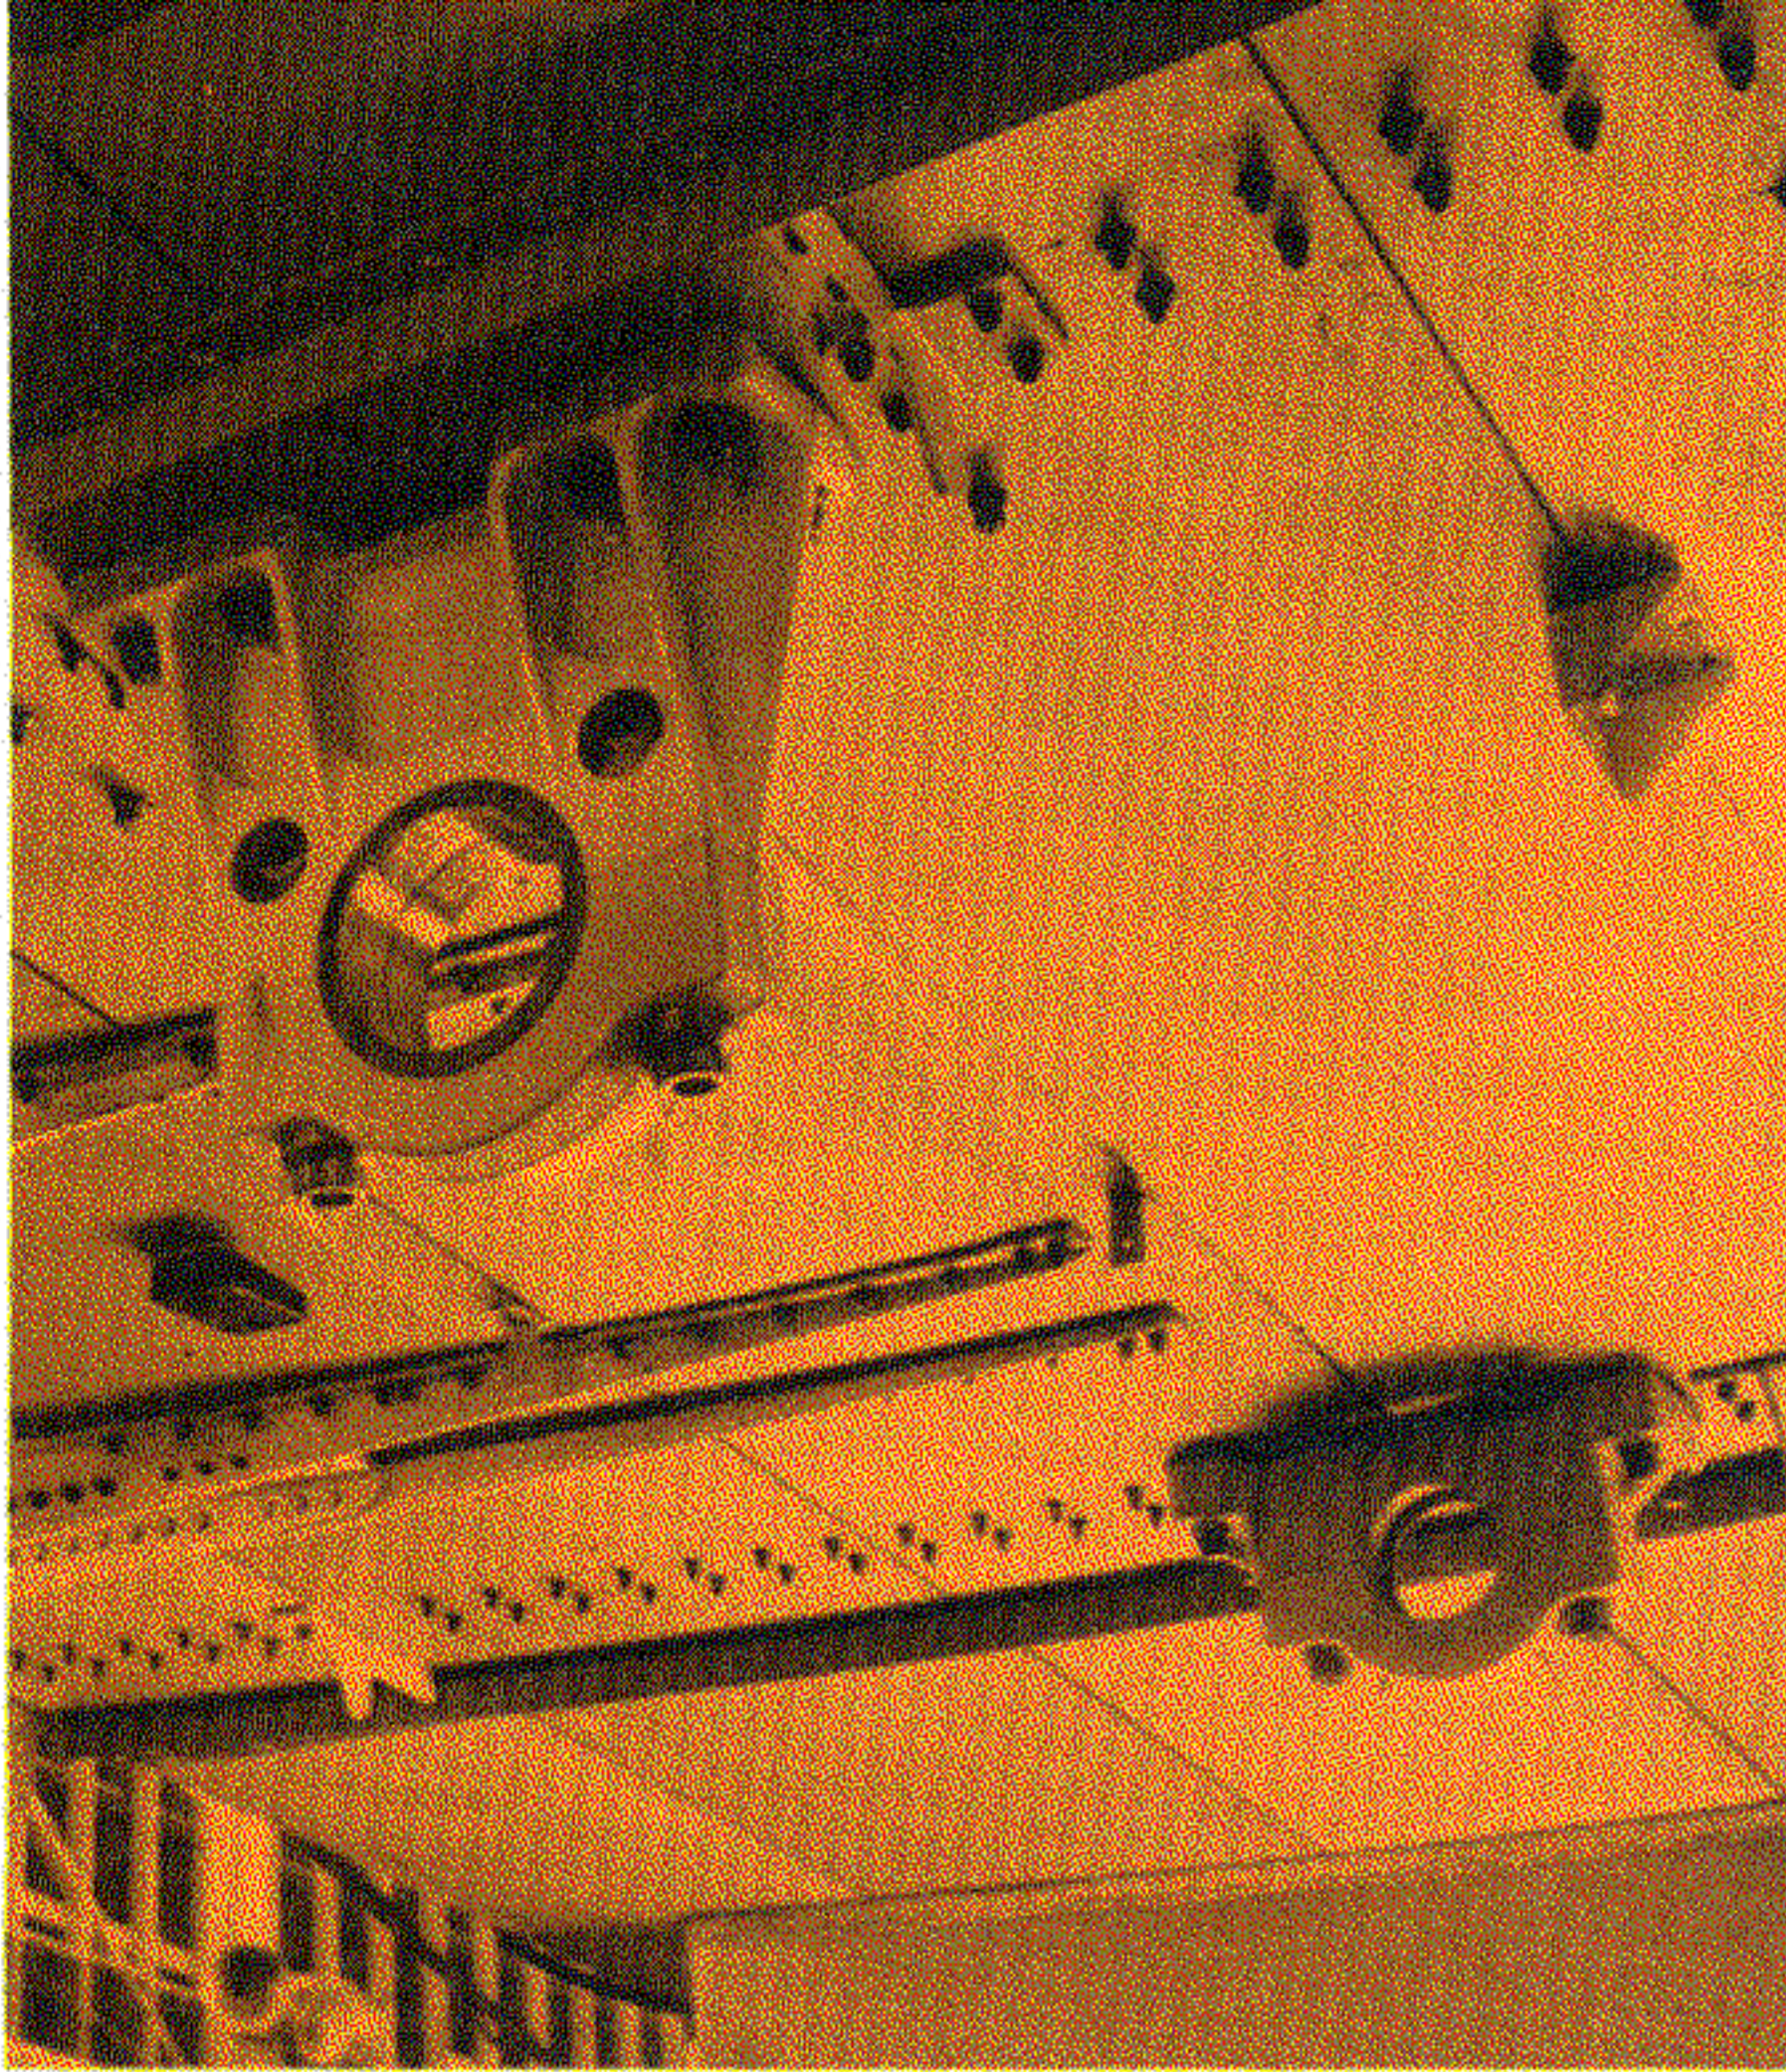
Main Landing Gear Attachment Fittings with Faying Surfaces Sealed
